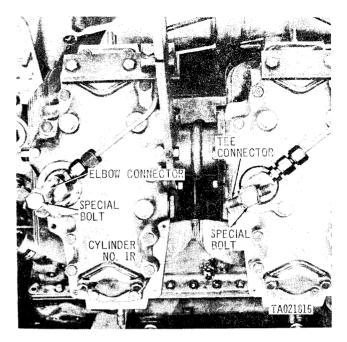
Removing or installing fuel injector nozzle, fuel tube elbow and tee connector, and special bolts.
